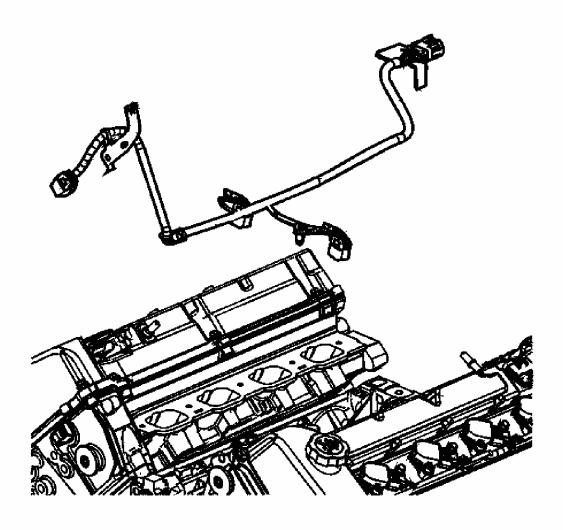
Identifying Crankshaft Position Sensor Wiring Harness Courtesy of GENERAL MOTORS CORP.
